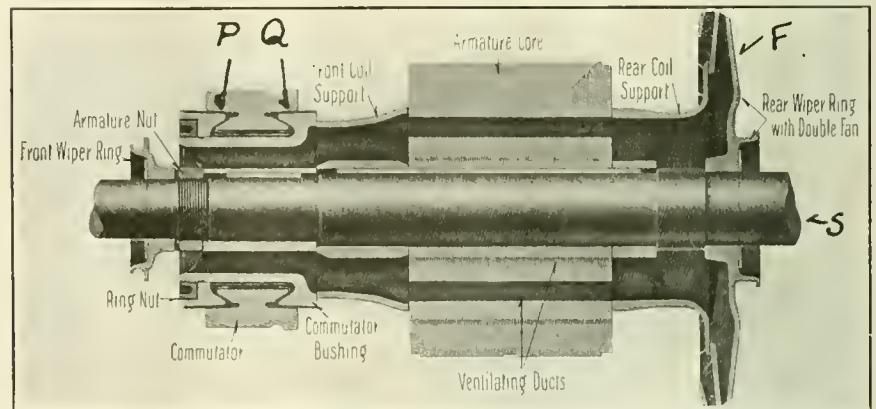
CROSS SECTION SHOWING ARMATURE PARTS MOUNTED ON SHAFT.
